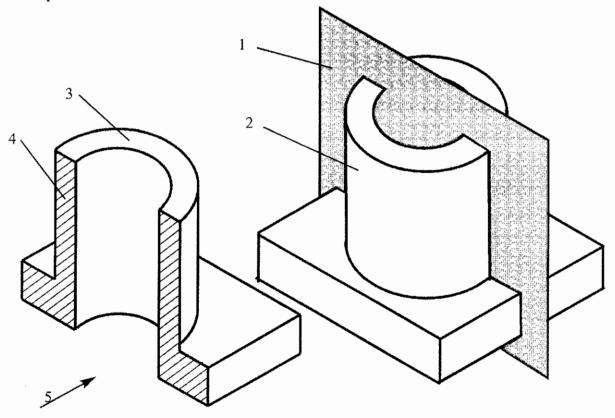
Elements of a sectional view 1. Cutting plane 2. Portion of the part to be removed 3. Sectioned part 4. Sectional lines 5. Direction of viewing
